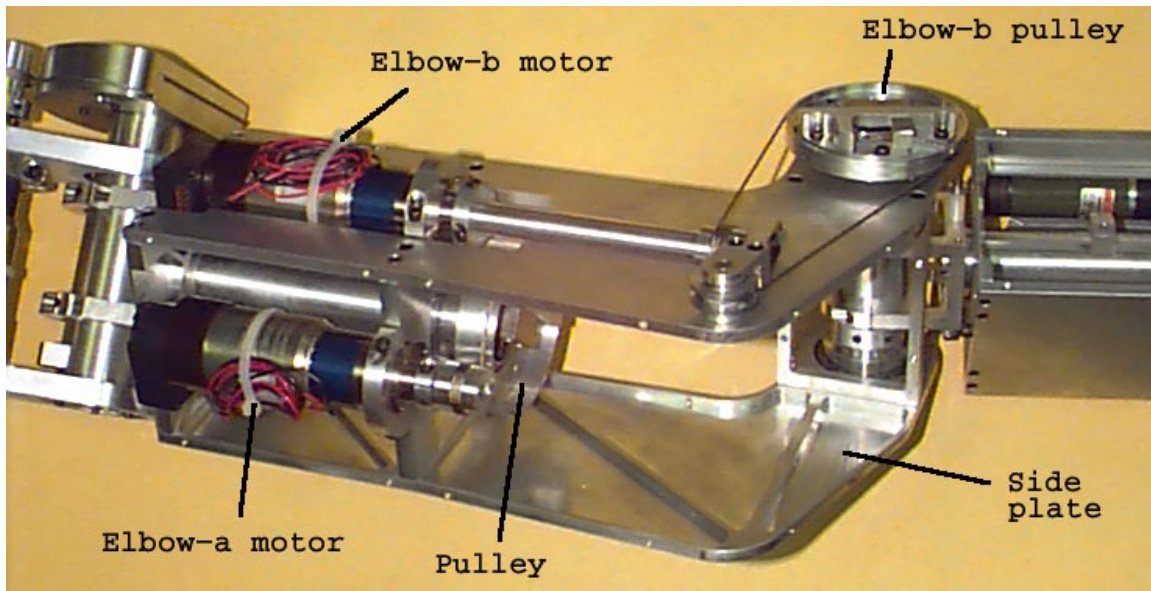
Photograph of the upper arm of the robot. Both motors are placed high up on the arm, so reducing the inertia of the link. The elbow-a motor is arranged as described in figure A-11 walking around the tube, and driving the whole upper arm around. The elbow-b motor drives the joint through a cable mechanism with an extra pulley. The lightweight construction of the arm is visible, with the side plates hollowed out, and most of the volume of the link being air.
